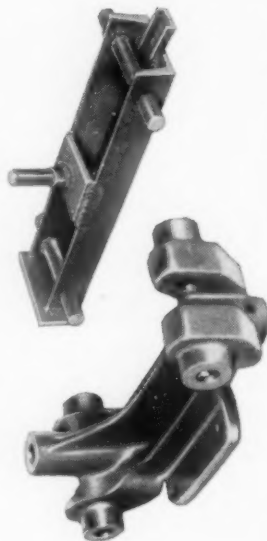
Stronger, more rugged machine part results when fabricated from steel strip and standard channel. Weight is cut from 3 lbs. to 2 lbs. 4 oz. Cost of this small part is 12% less.
